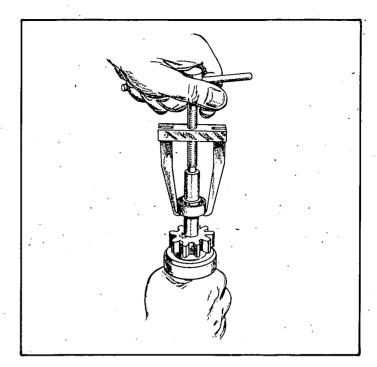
MOUNTING OVERRUNNING CLUTCH
